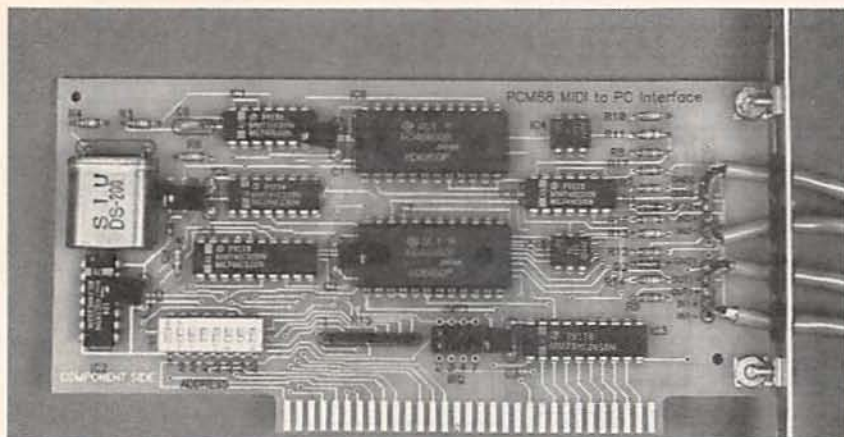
THE COMPLETED PROTOTYPE CARD. The MIDI jacks are wired directly to the circuit board using shielded twisted pair.
